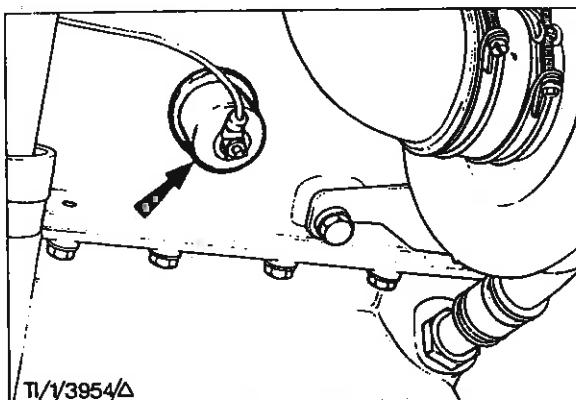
Oil Pressure Sender Unit and Electrical Connection
